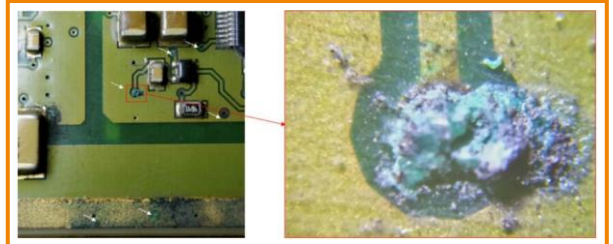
Corroded PCB boards and components inside the inverter
